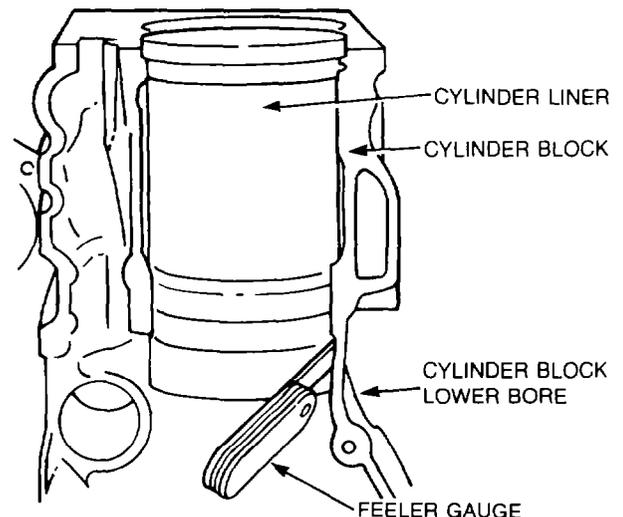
Measuring Cylinder Liner to Lower Cylinder Block Clearance
